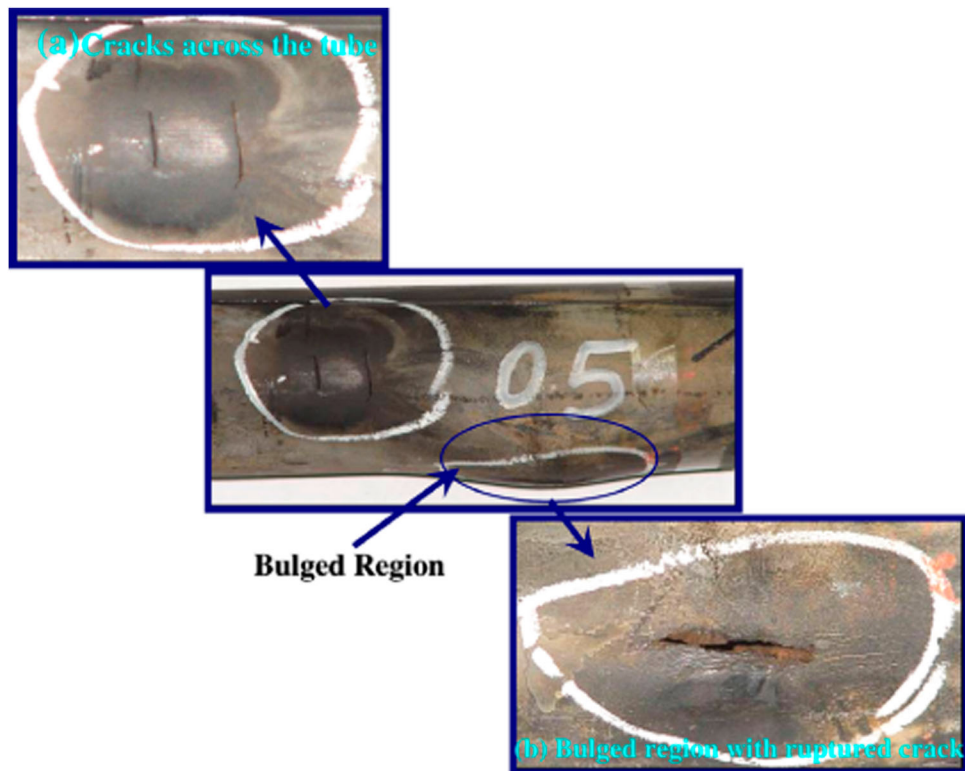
Cracked and ruptured portions of heat exchanger tube due to manufacturing defects [36].
